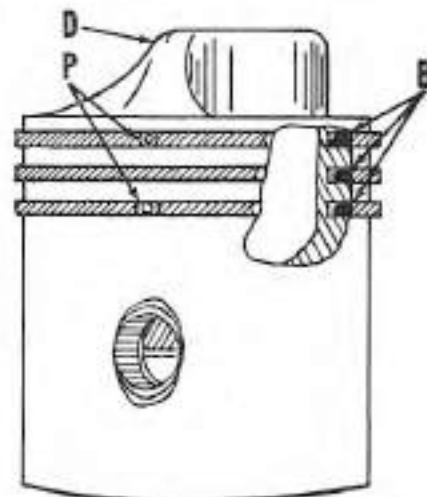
Cross sectional view of Fleet Scott piston showing two of the three piston ring locating pins (P). The other pin is in opposite side of piston. Rings are installed with beveled inner edge (B) to the top. Deflector (D) directs the flow of incoming fuel charge for proper scavenging. Fishing Scott pistons are similar except that locating pins (P) for the two rings are located in opposite sides of piston.
